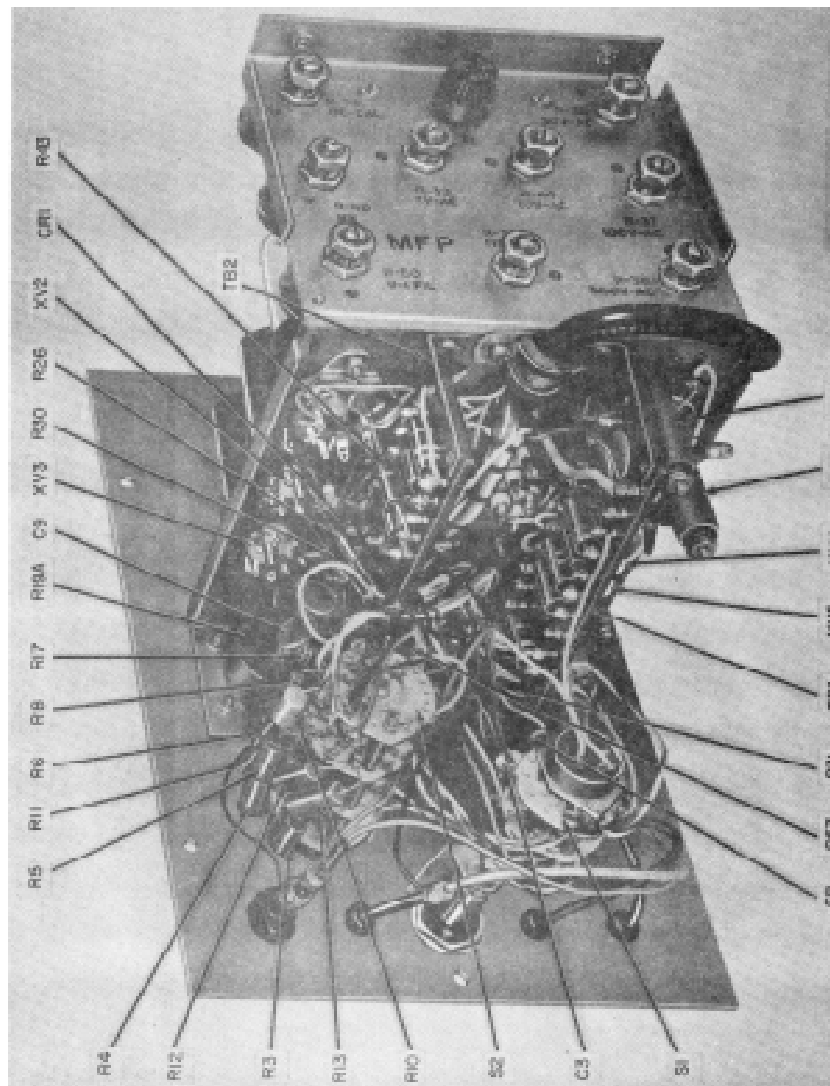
Multimeter ME-26A/U chassis, right side view.
